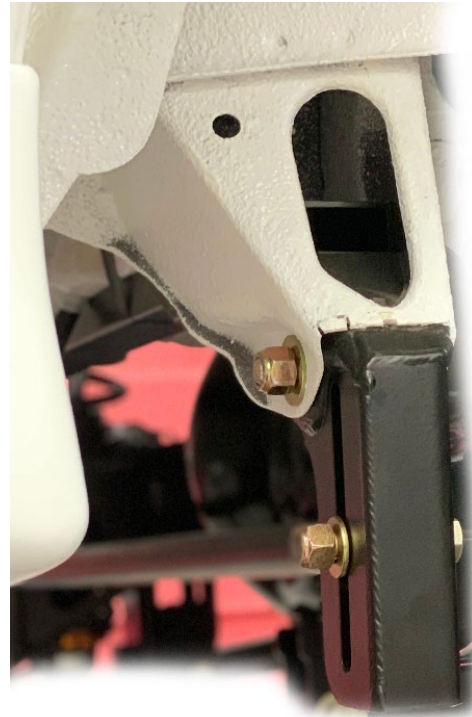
Bolting the passenger side of the crossmember to the factory plates
